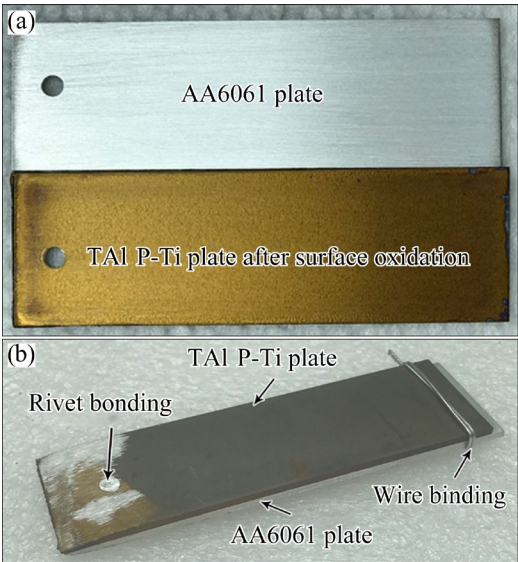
Materials preparation before cold roll bonding: (a) Physical drawing of TA1 P-Ti plate surface oxidation; (b) Physical drawing of blank assembly
